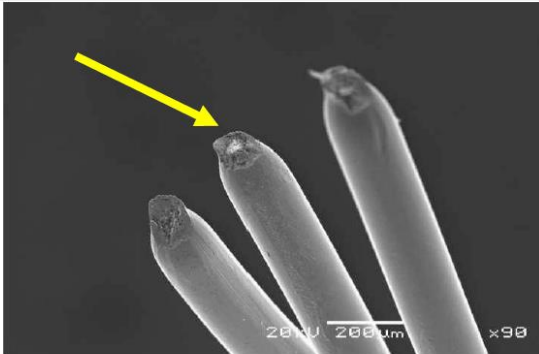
Fractograph showing core wire fractures (x90, SEM)
